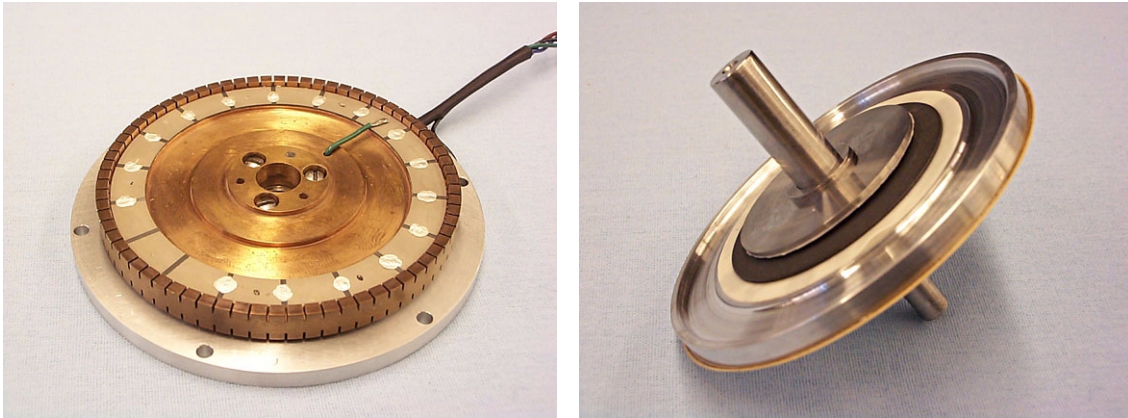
Components of the one-sided prototype motor: (a) mounted stator, and (b) assemblage of the rotating components.
